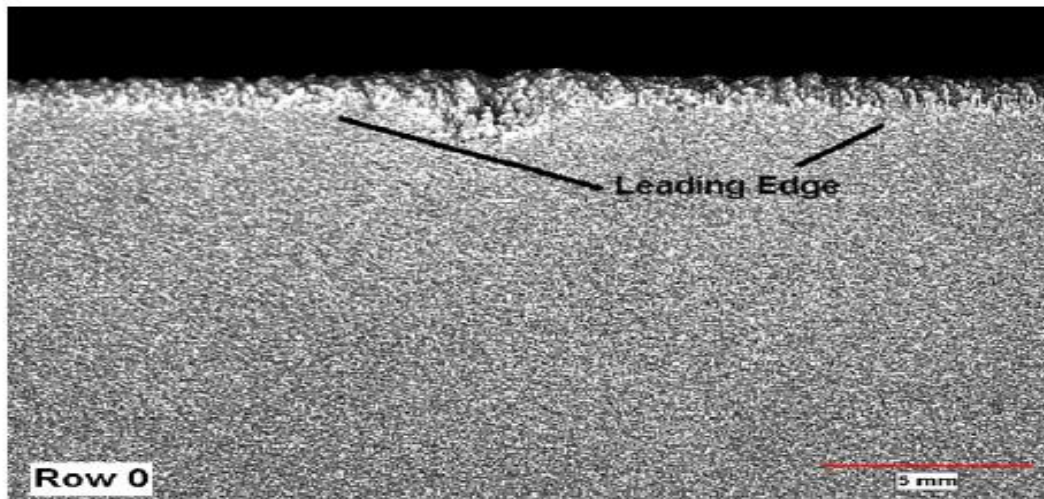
C. Eroded leading edge of a rotor blade of a first stage of a compressor. The picture shows the mid-span of a first stage compressor (axial) rotor [Ref 16]
